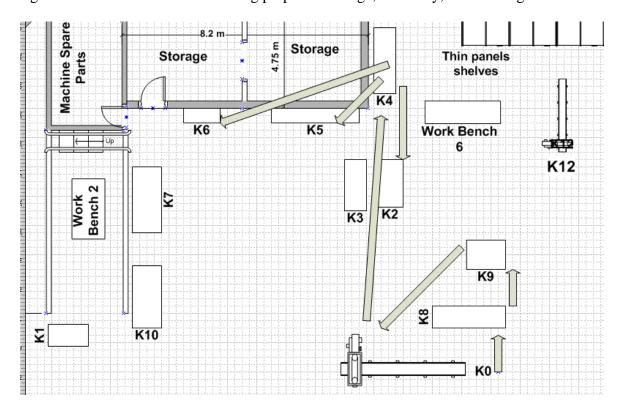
Work Flow of Frame Preparation Stage in the New Layout
